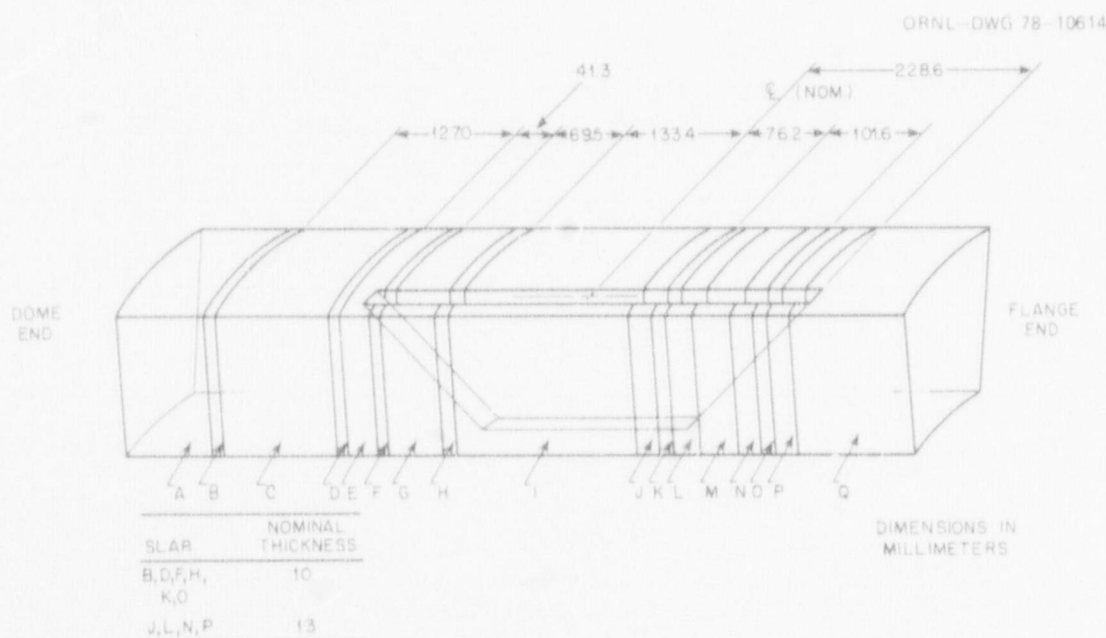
Block cut from intermediate test vessel V-7B containing entire repair weld and fracture zone. Slabs A through Q were cut after all ultrasonic examinations were completed.
